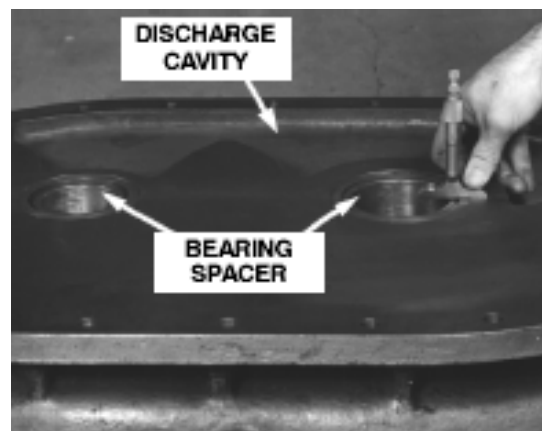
DISCHARGE END BEARING CARRIER
